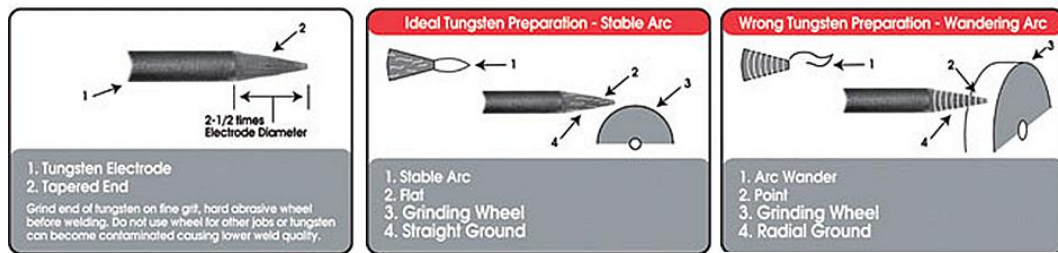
Tungsten preparation for negative electrode welding, DC and AC power sources and the formation of a wave.
